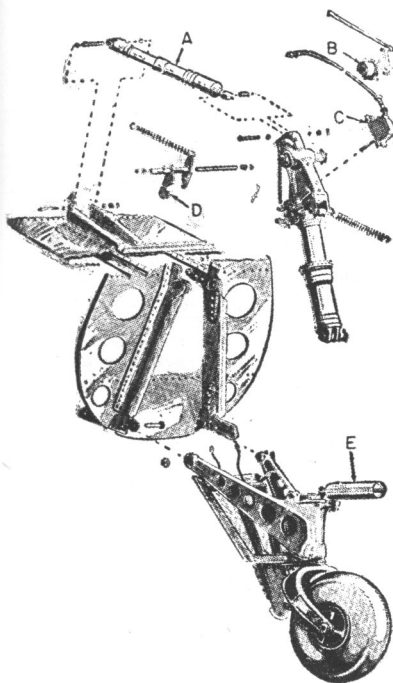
Exploded view of the F6F retractable tail wheel in relation to the bulkhead to which it is attached: (A) hydraulic retracting cylinder; (B) position indicator; (C) warning switch; (D) up lock; (E) wheel centering mechanism.
